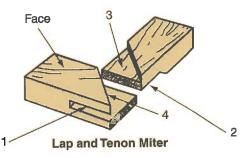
Cuts taken to make a lap and tenon miter. (Delta International Machinery Corp.)
